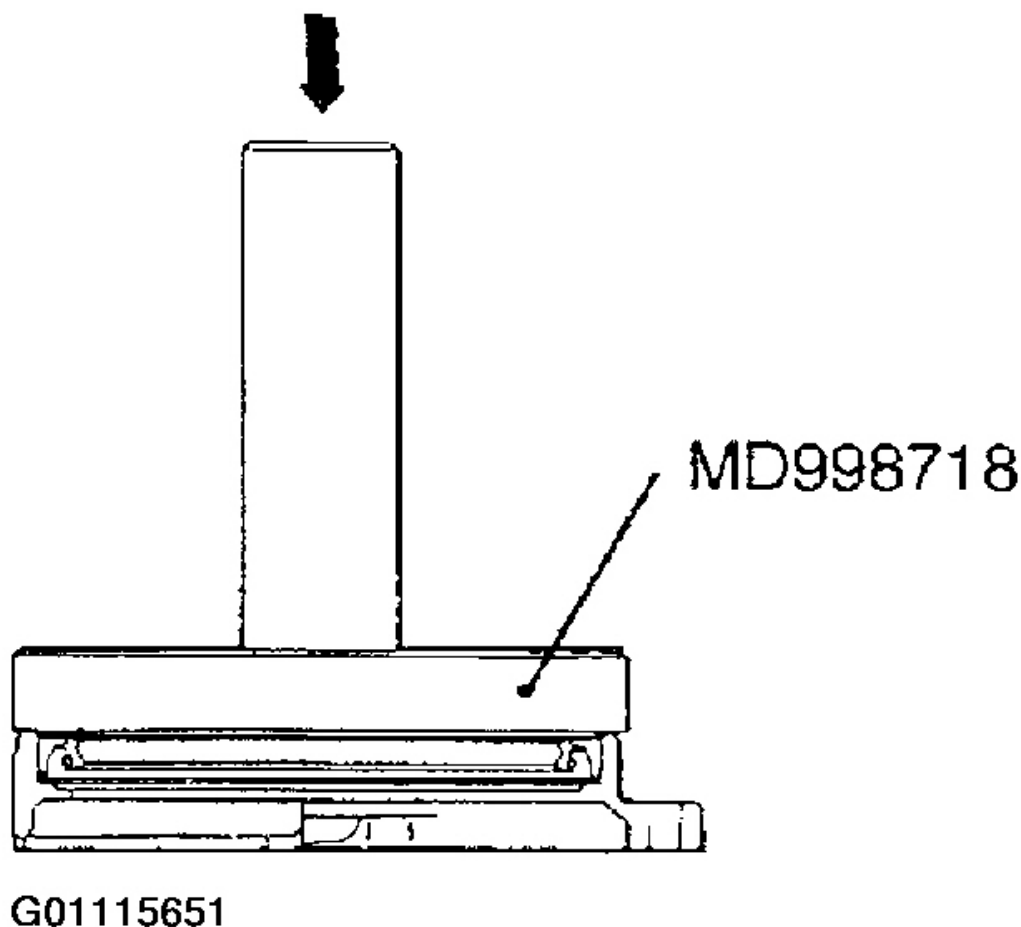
Press-Fitting Crankshaft Rear Oil Seal Into Oil Seal Case
